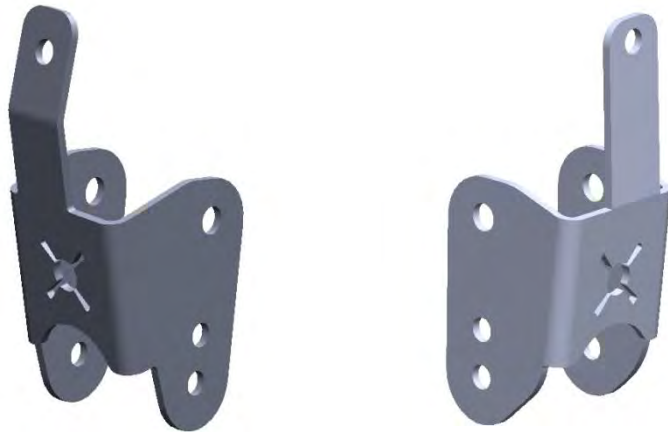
Driver Side (Left) and Passenger Side (Right) LCA Brackets.
